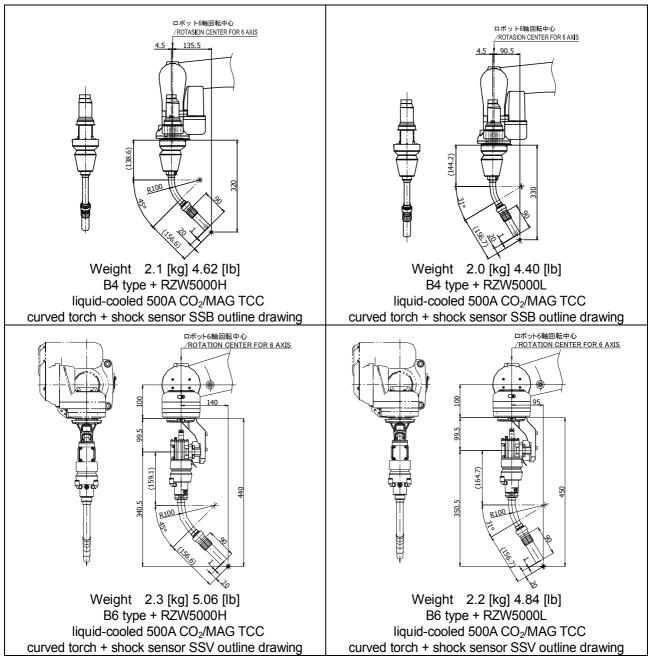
Outline drawing of Liquid-cooled 500A TCC torch (for B4 type, B6 type) Unit (mm)
